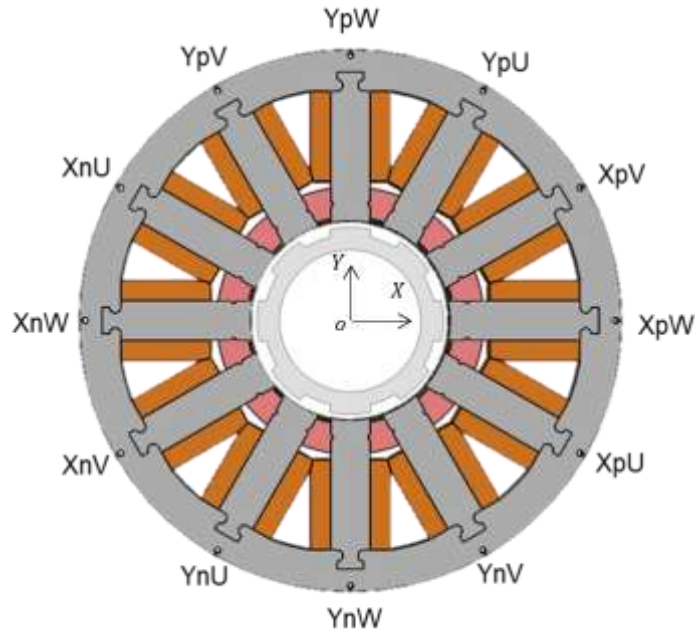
Horizontal cross-sectional view of the proposed BELSM.
